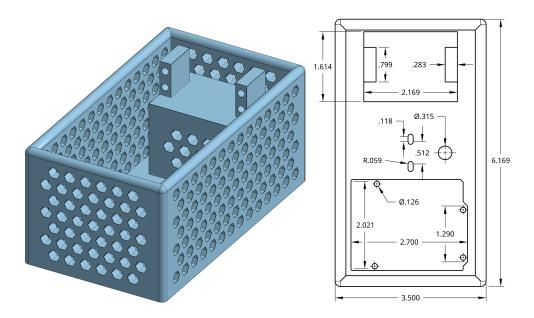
Isometric view (left) and dimensioned drawing (right) of aforementioned housing. Note that all dimensions are in inches.
